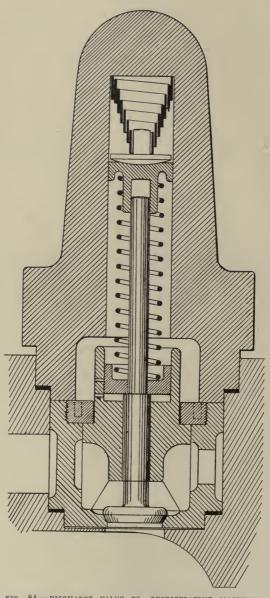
DISCHARGE VALVE CO2 REFRIGERATING MACHINE,
